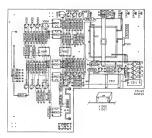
Galvanic separation p.c.b., lay-out, component side
